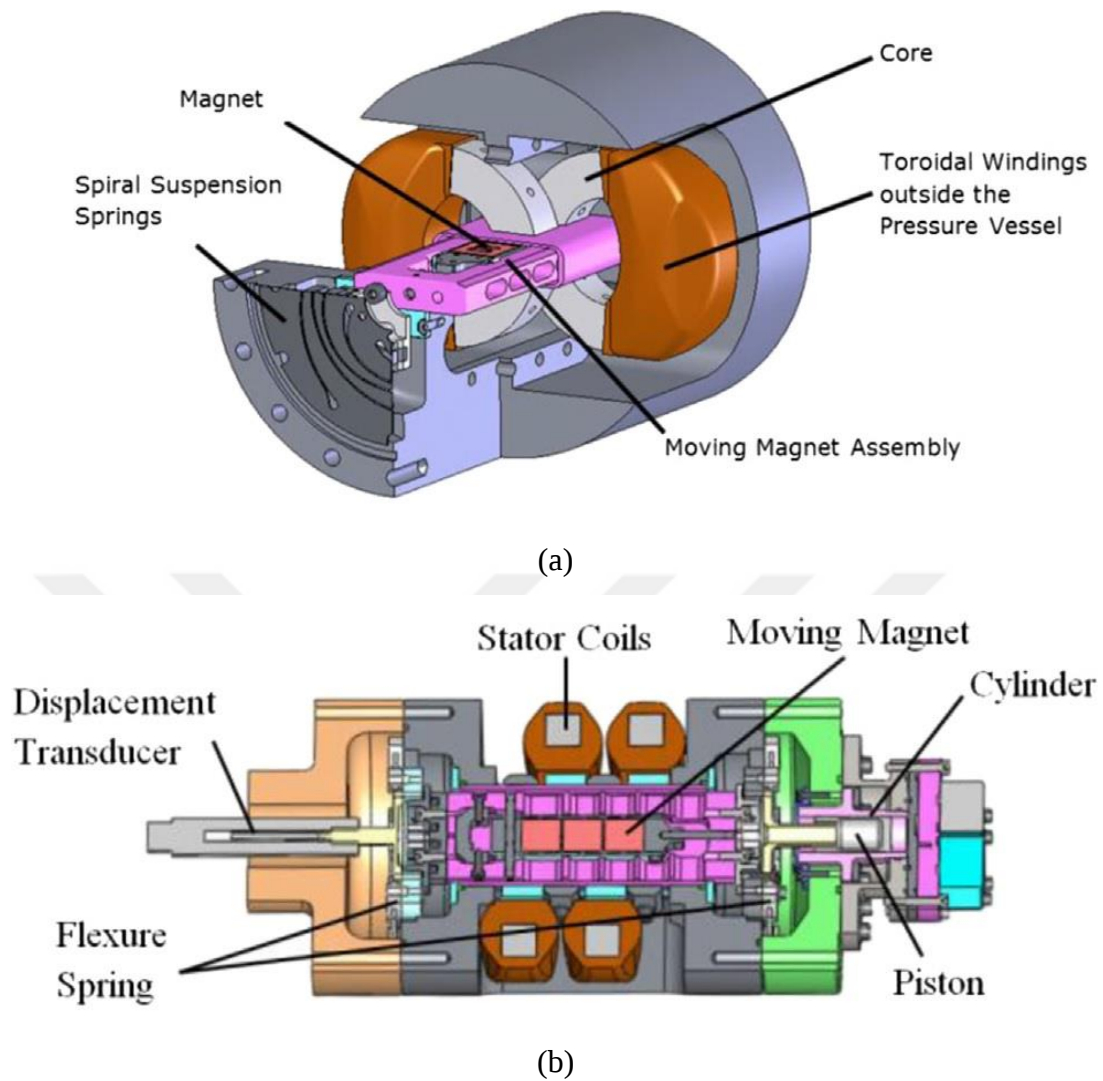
Schematic of a linear compressor: (a) motor design (b) cross-sectional view of the compressor [5]
